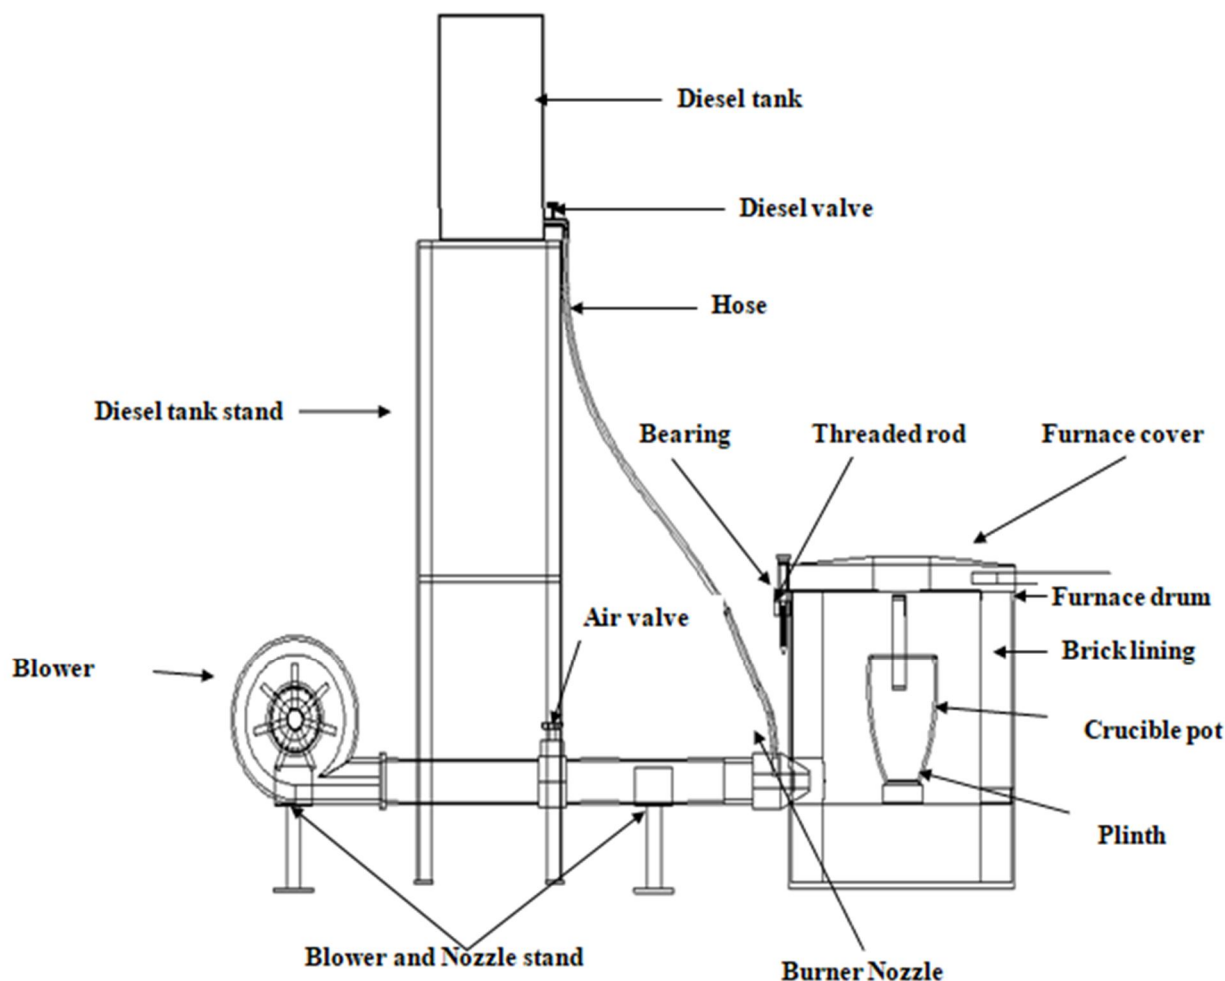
Drawing of the Cast-Iron crucible Furnace (side view wireframe)
